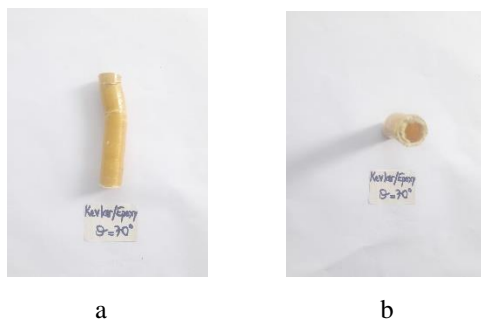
Damage formation of kevlar/epoxy specimen under axial compression load; a) front view, b) top view
